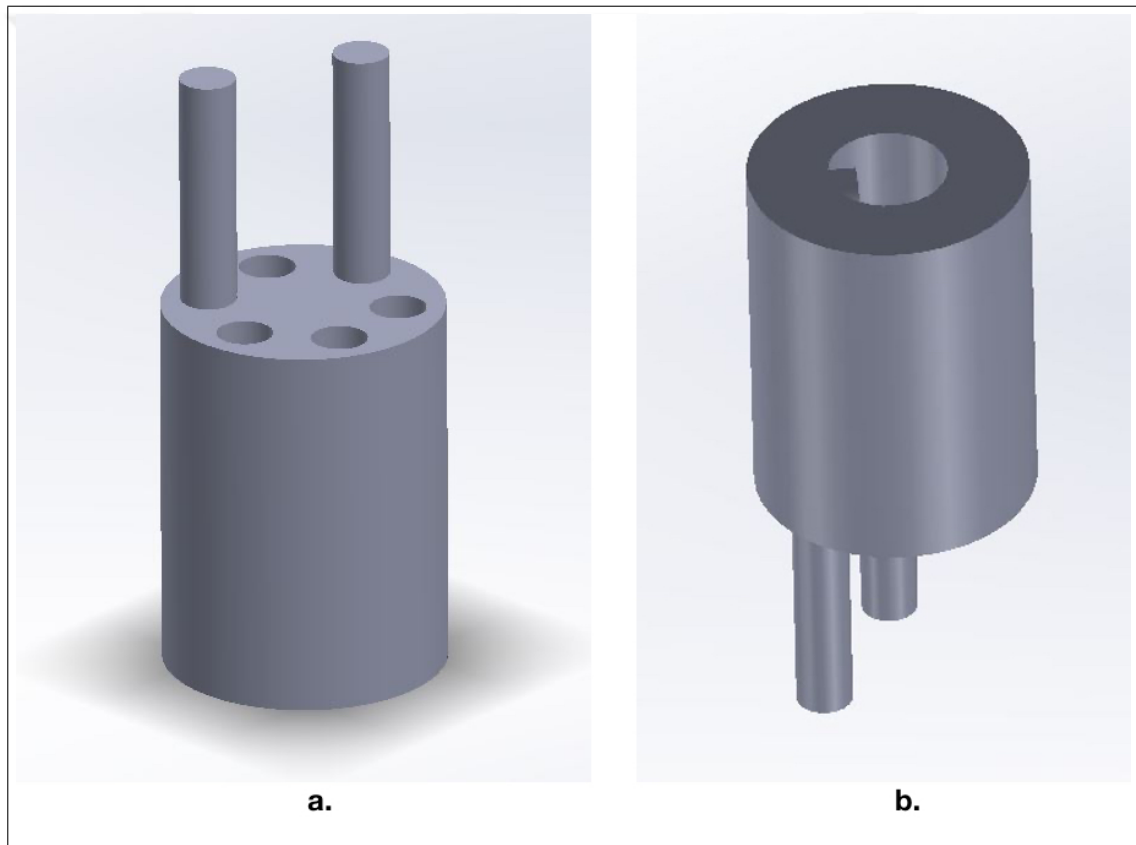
The first design of 6 holes bender head (a.Top view b.Bottom view).
